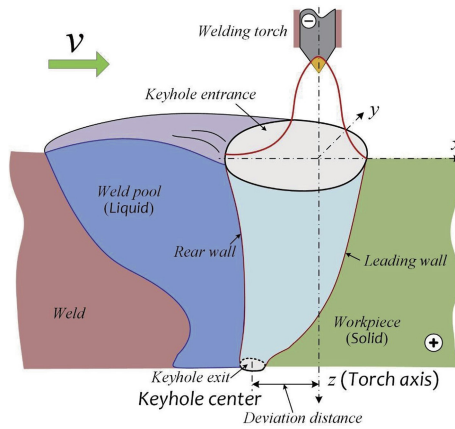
Sectional view of weld specimen during K-TIG welding process [32]
